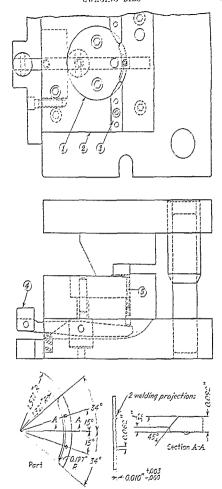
Die to swage herel and welding projections on a type segment. (Wational Cash Register Co.)
